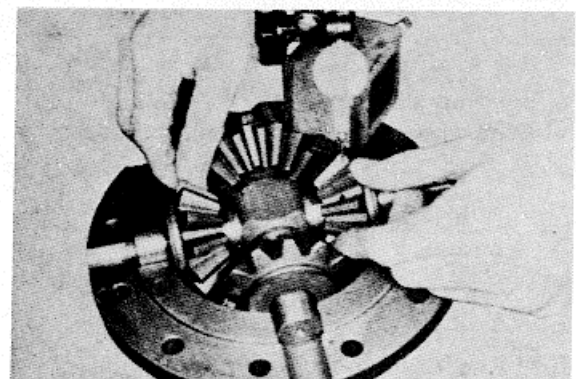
Checking Backlash on Side Gears and Pinion Gears
